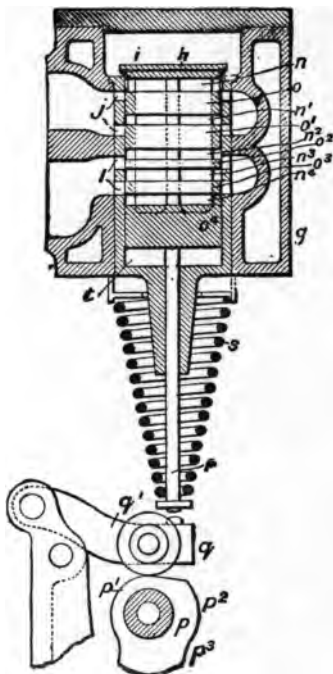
Britannia Company's (Gibbon's Patent) Petroleum Carriage Motor (Enlarged Section through Valve).
